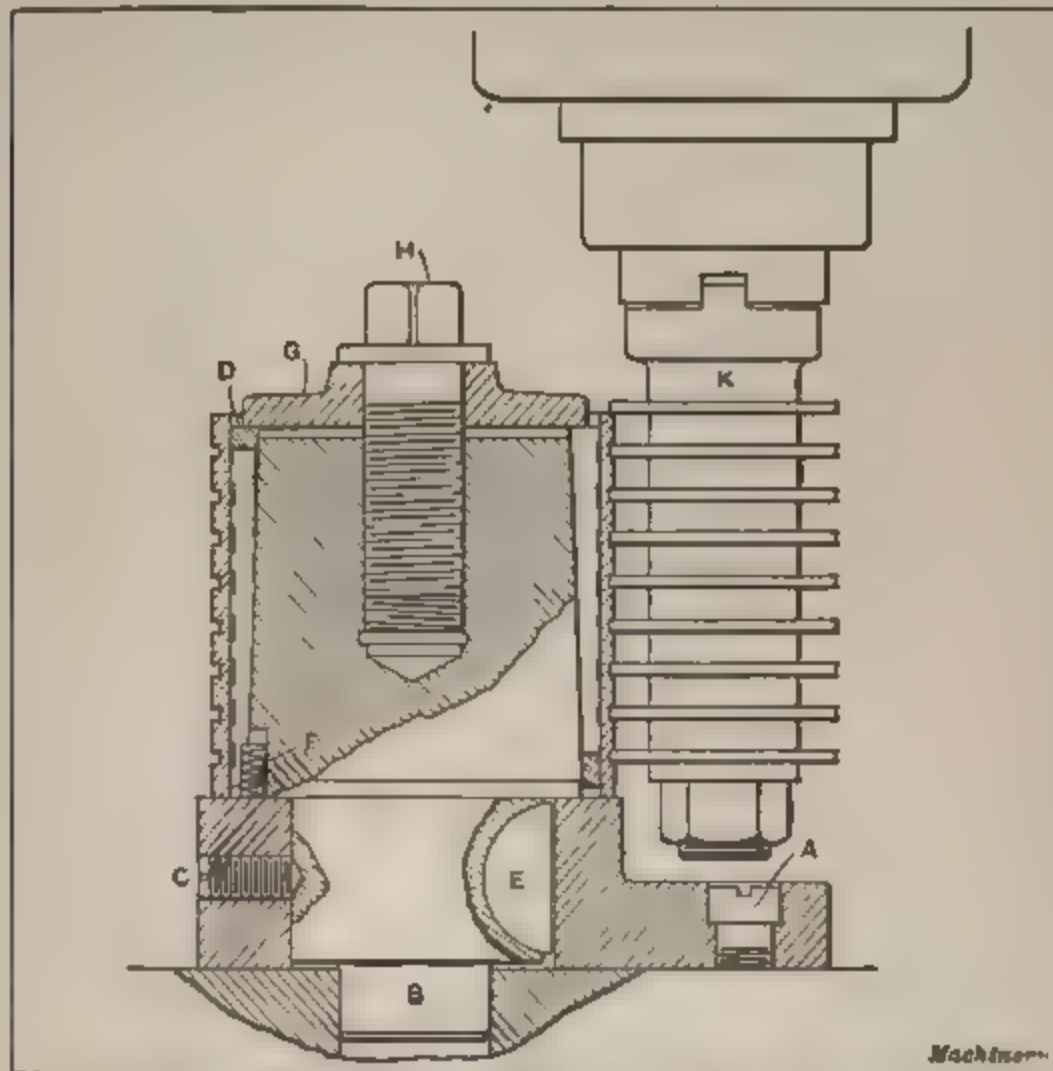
Expanding Arbor for holding Casting while Gang-sawing Packing Rings
